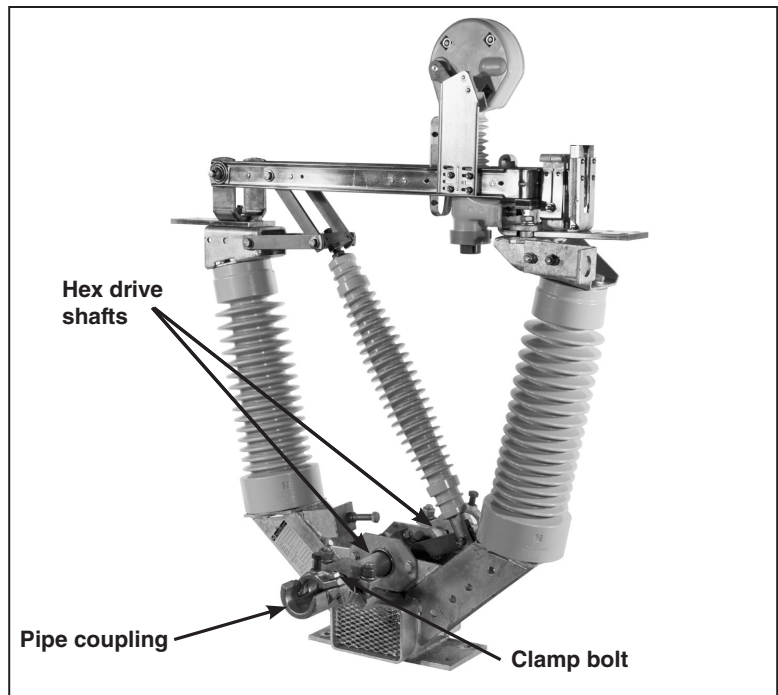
Attach the pipe couplings to the switch hex drive shafts.
